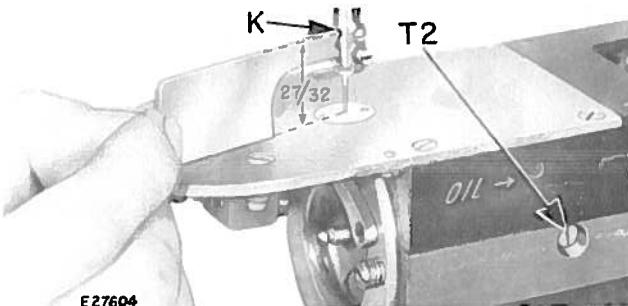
Checking Needle Bar Height (Using Gauge 239369)
